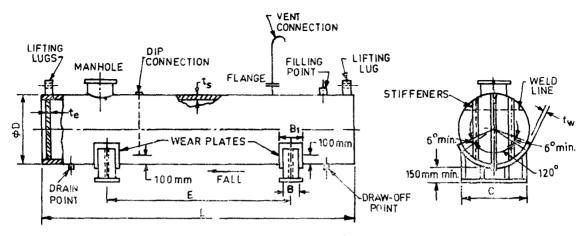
TYPICAL ARRANGEMENT OF ABOVE-GROUND HORIZONTAL TANK
